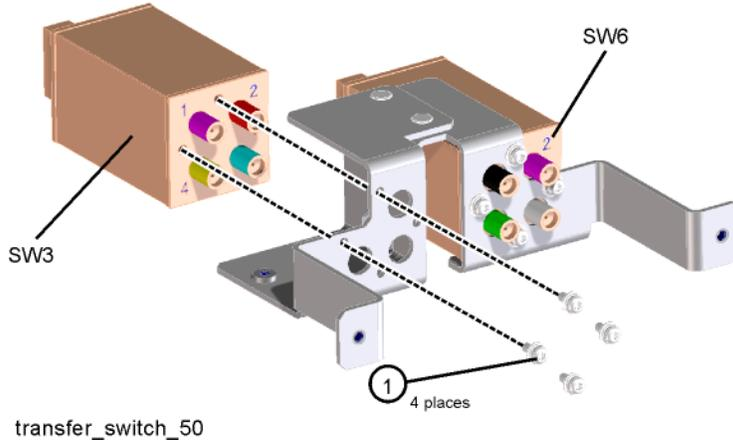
Removing Transfer Switch from Bracket - Options 544, 550
